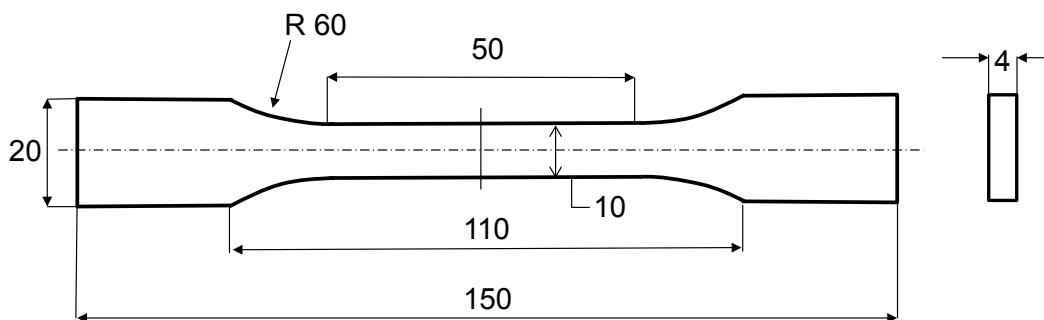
EN ISO 527-2 type 1B geometry for the tensile test specimen [171]
